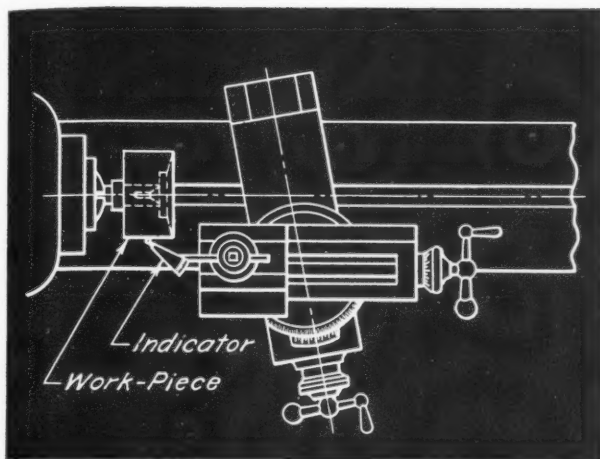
(Above) With a finished work-piece in the lathe chuck, and a test indicator in the toolpost, parallelism of compound-rest movement can be checked
